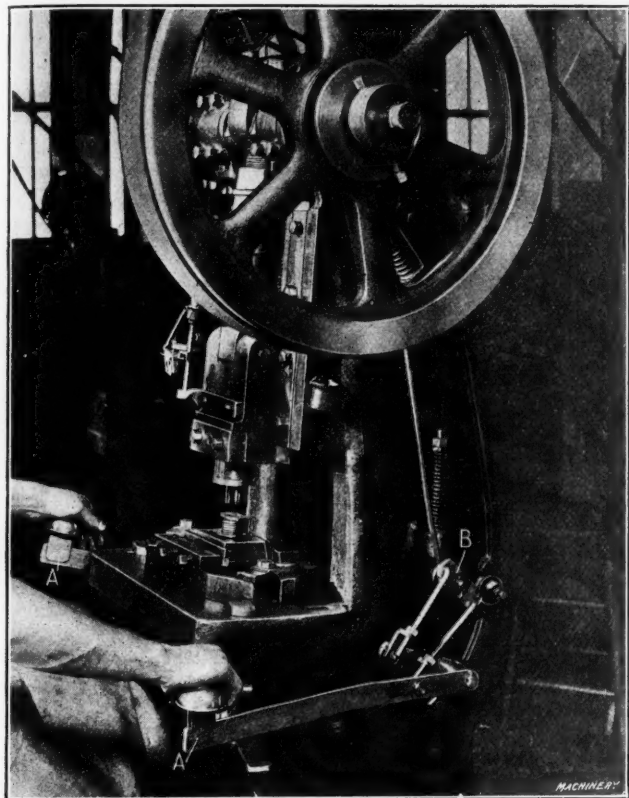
Arrangement of the Benjamin Stamping Press Guard
